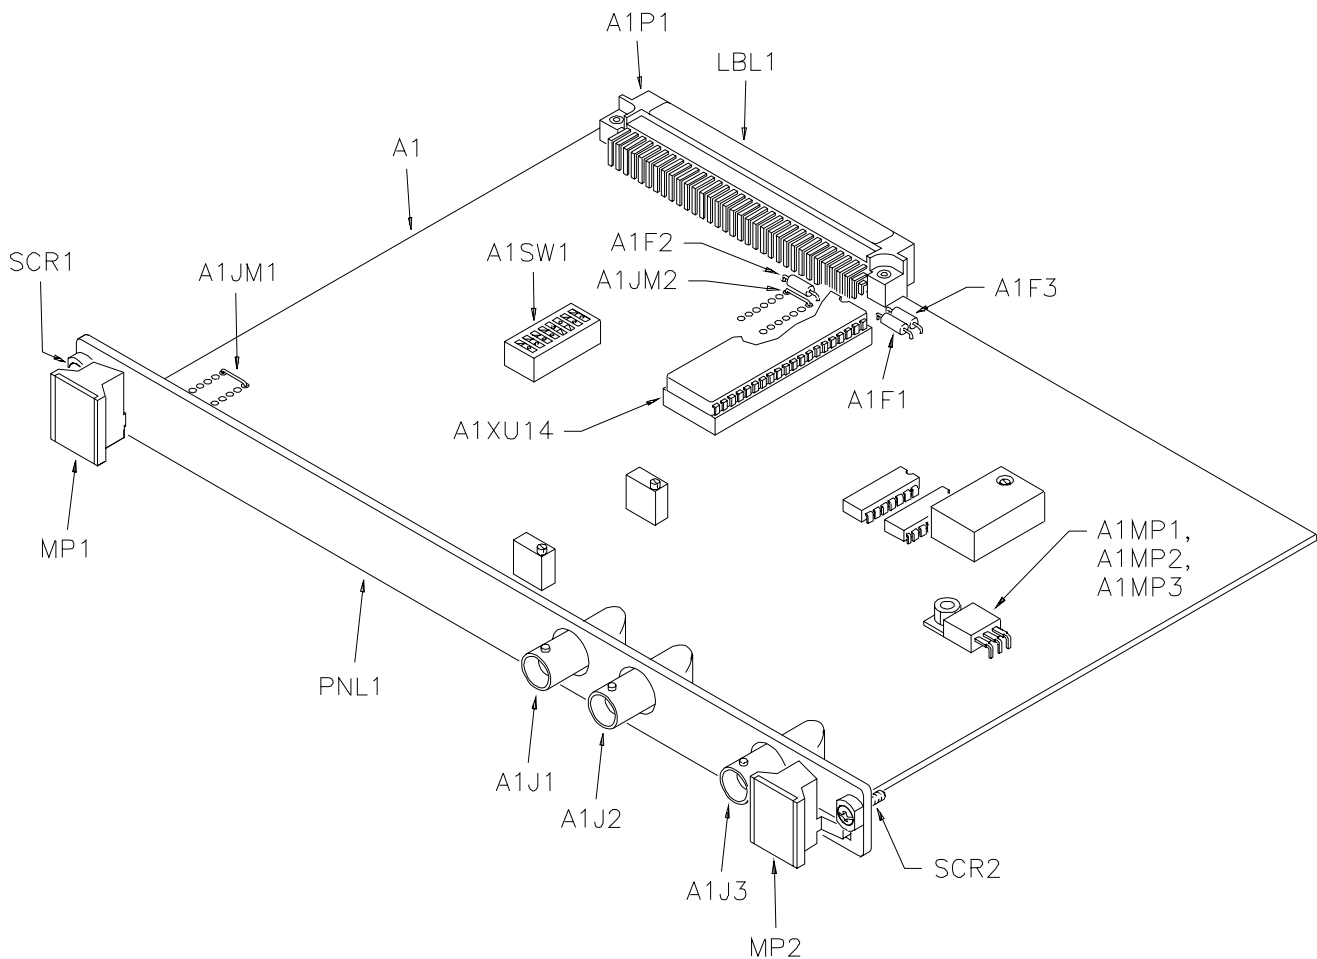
Agilent E1333A Counter - Replaceable Parts
